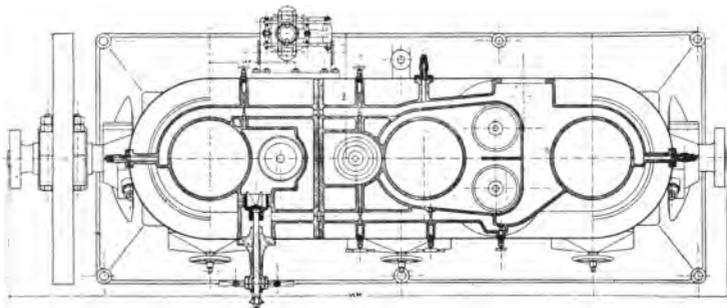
SECTIONAL PLAN OF MERTZ'S ENGINE.
